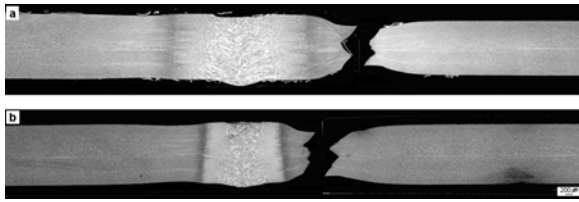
Cross-sections of specimen after perpendicular tensile test: (a)1.5m/min, (b)3.6m/min
